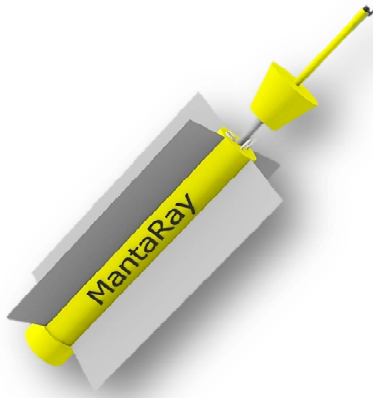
MantaRay Drifter Pressure Housing CAD Design
